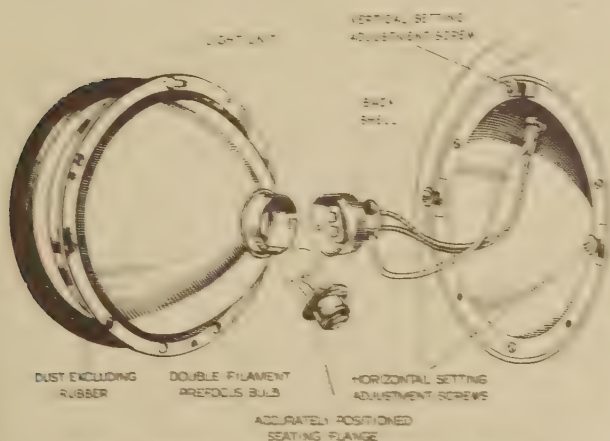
The Lucas Flush-fitting Headlamp, Mark I.
